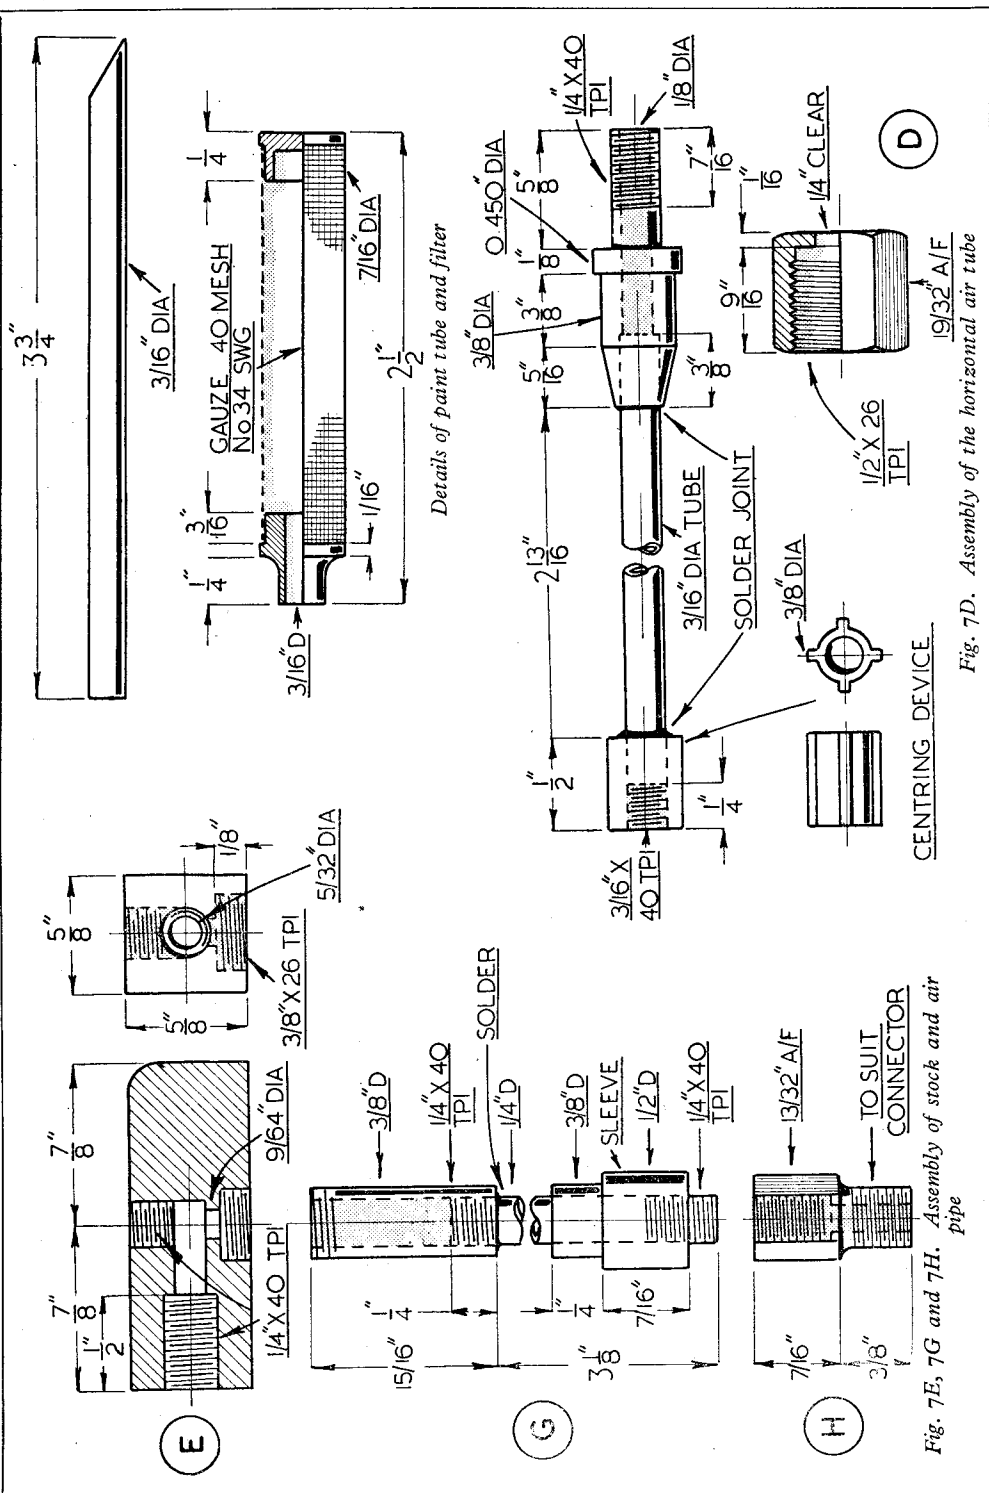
E, 7G and 7H. Assembly of stock and air pipe
